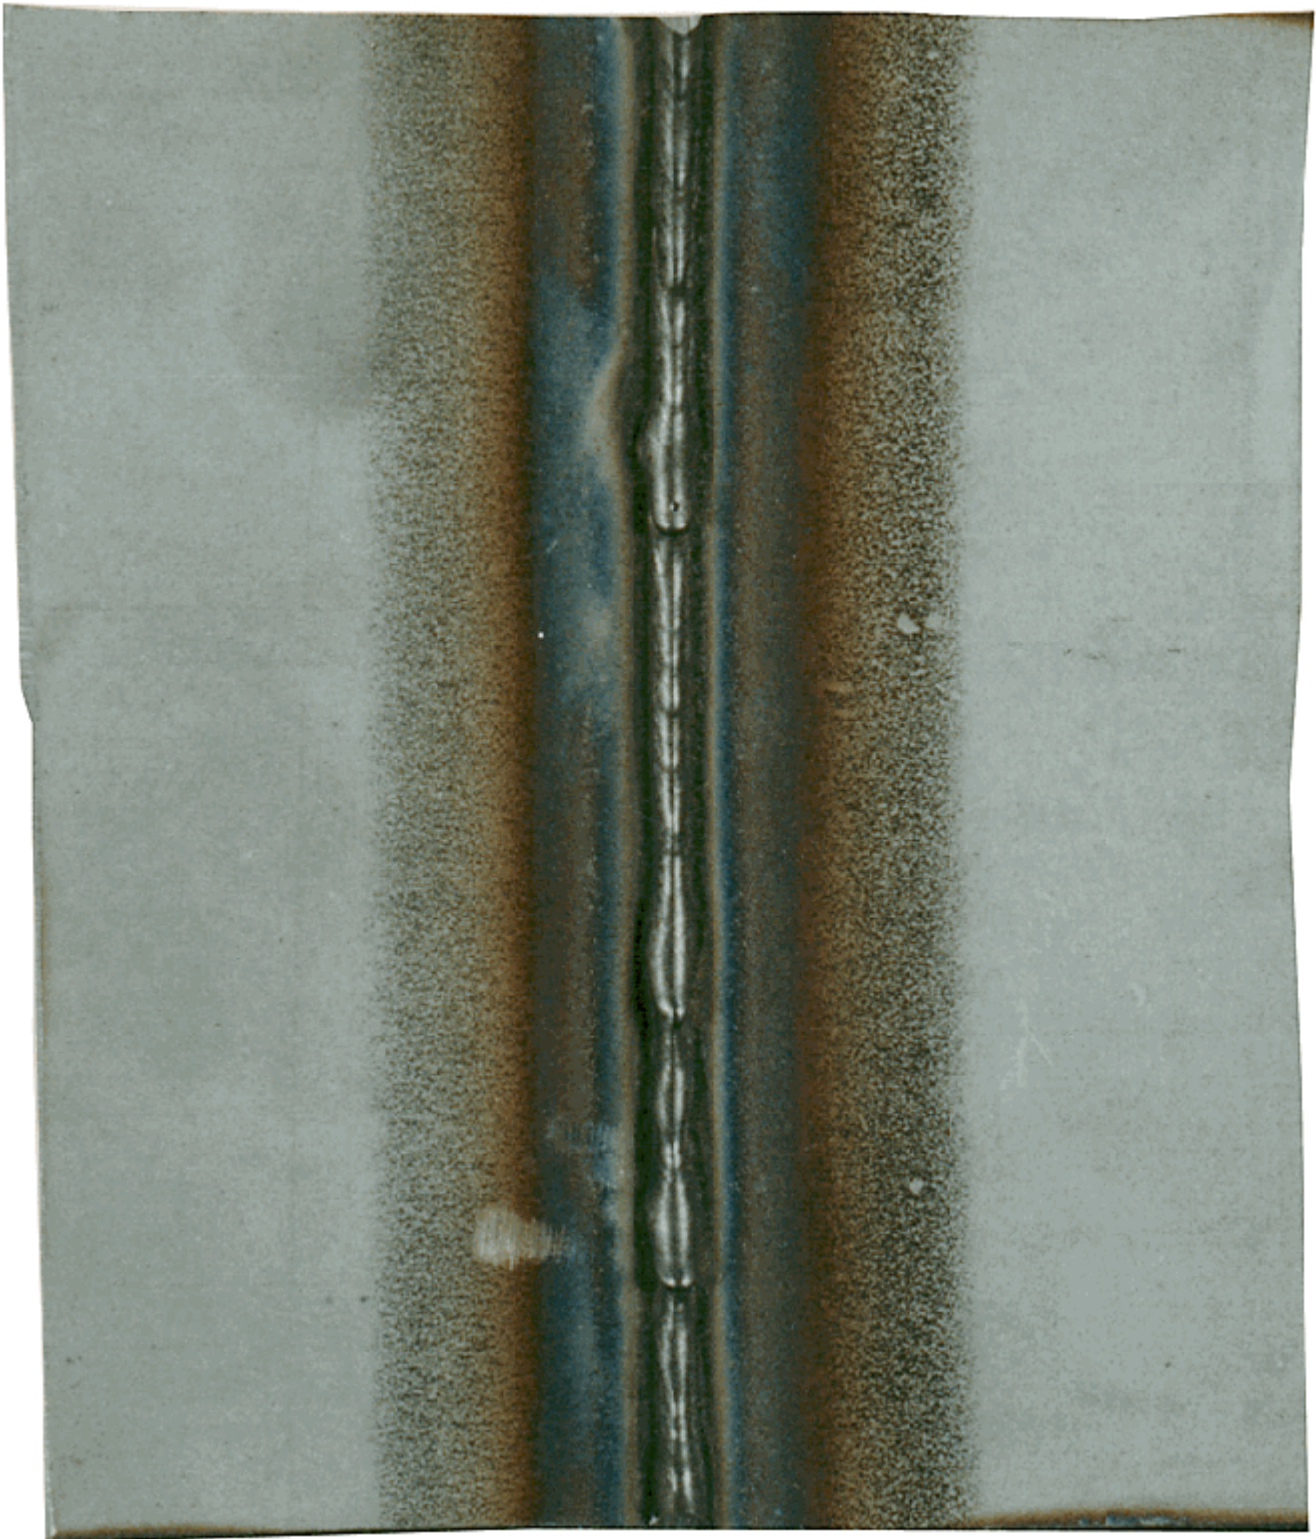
UNACCEPTABLE; OXIDE LAYER PRESENT (GREY COLOUR), WELD BURNED; LACK OF PROPER BACK-PURGING
